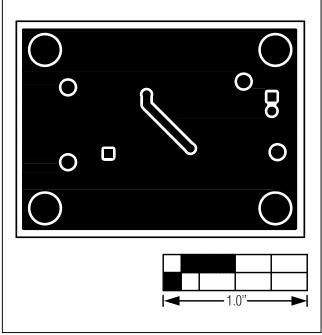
MAX9613 EV Kit PCB Layout—Solder Side>
